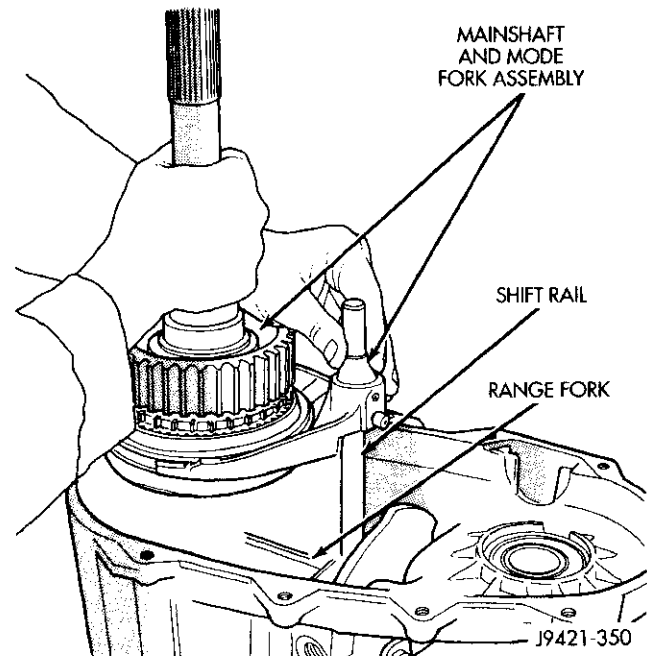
Installing Mainshaft And Mode Fork Assembly
